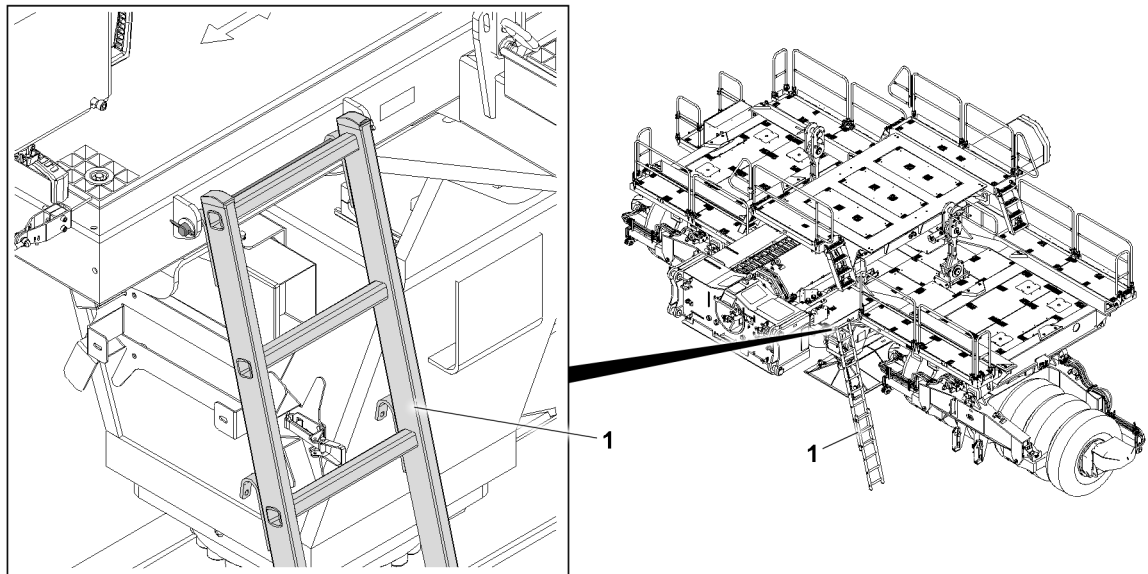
Assembling the extension ladder on the ballast trailer guide
